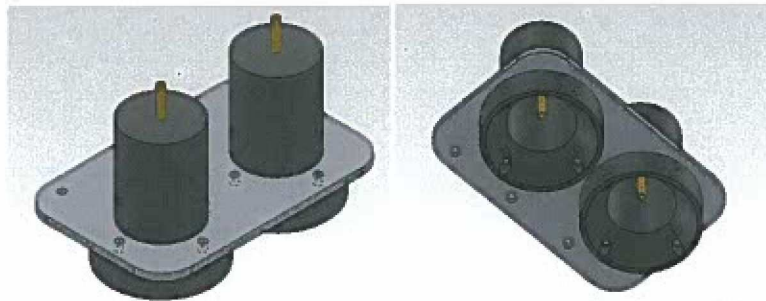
Top view (left) and bottom view (right) of fuel extraction device showing brass tubing used to penetrate petroleum layers. The cones are shown in the bottom view and are inside the hollow cylinders
